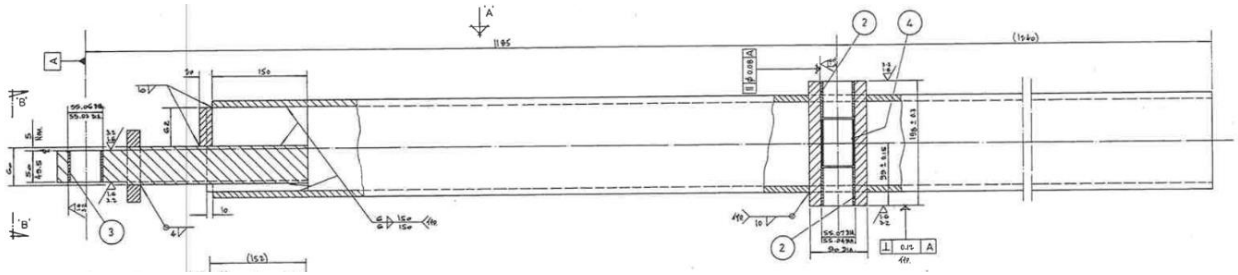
Shaker Drive Assembly (SDA) – Plan View (Howden, 1979)
